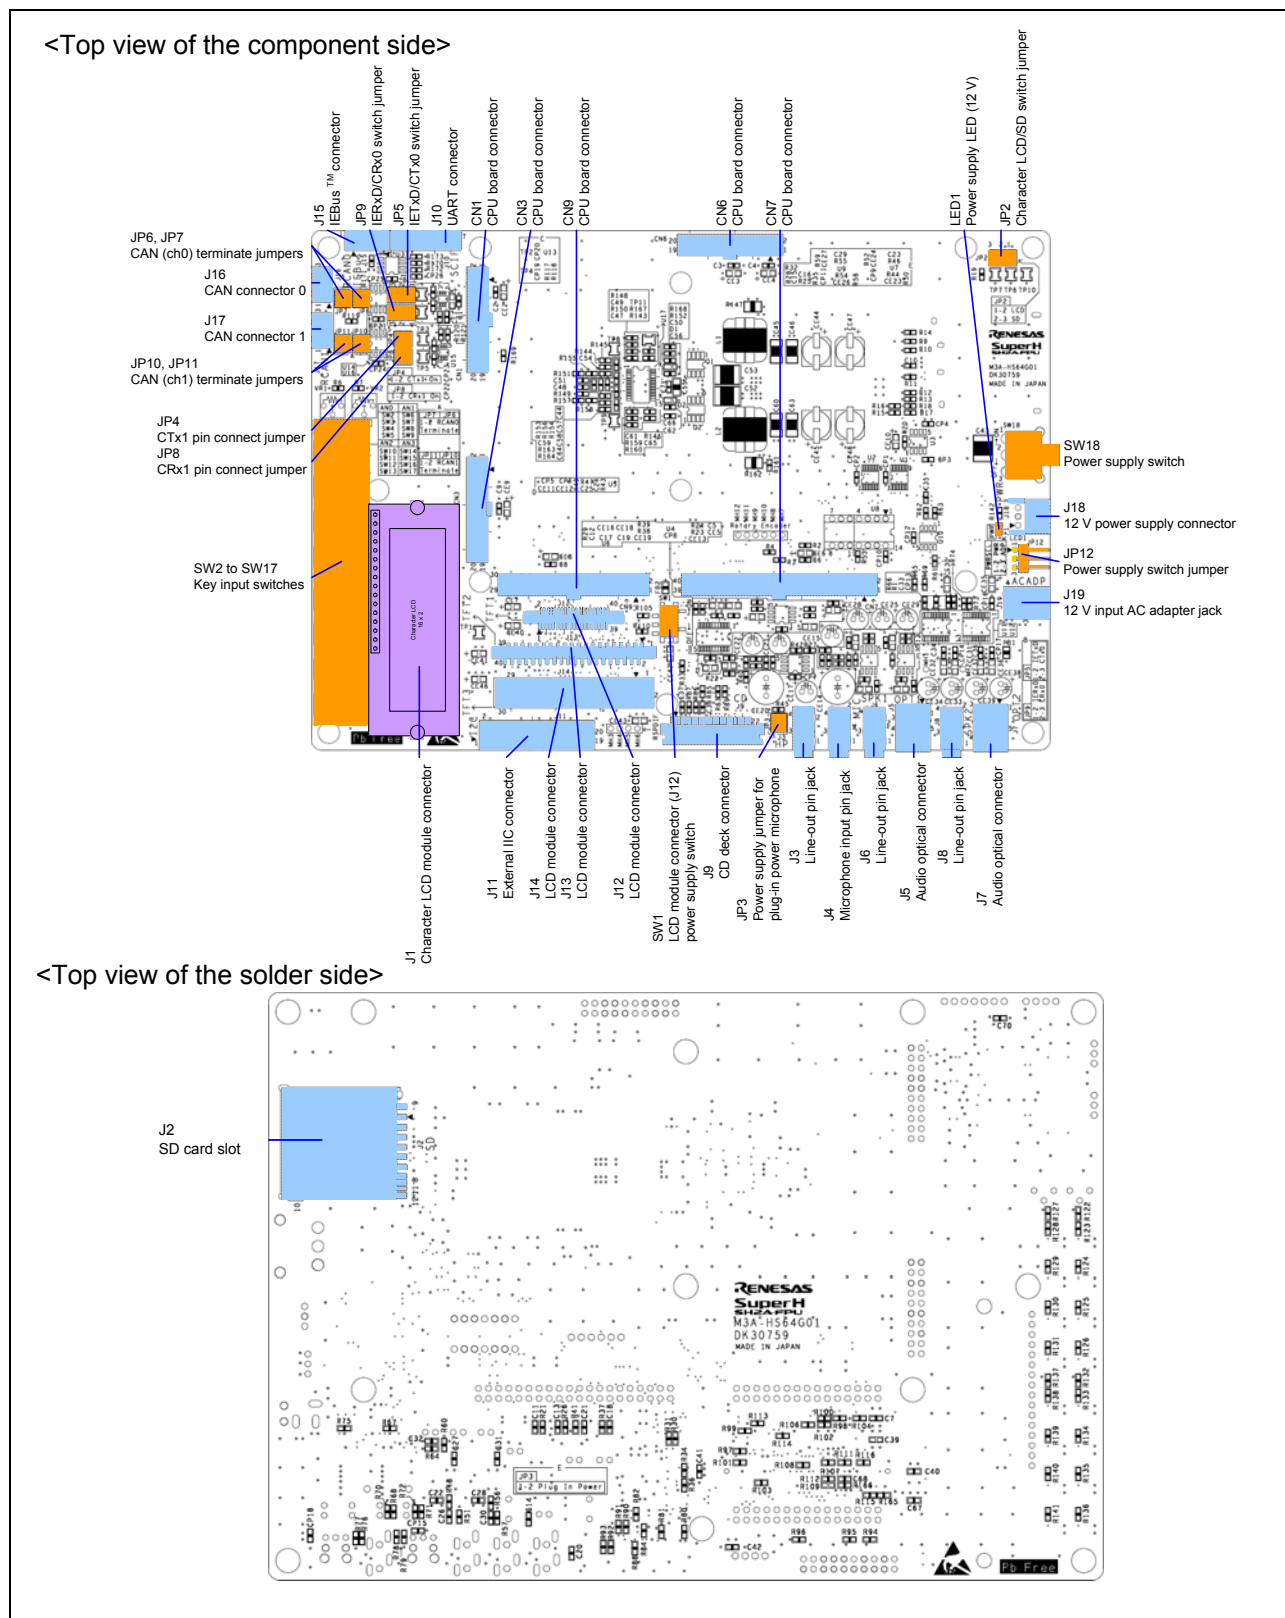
M3A-HS64G01 Layout and Component Placement
